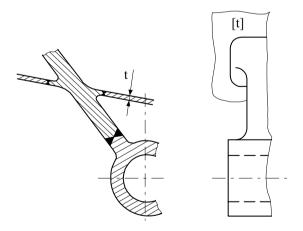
Welded joint between wale plate and side plating
